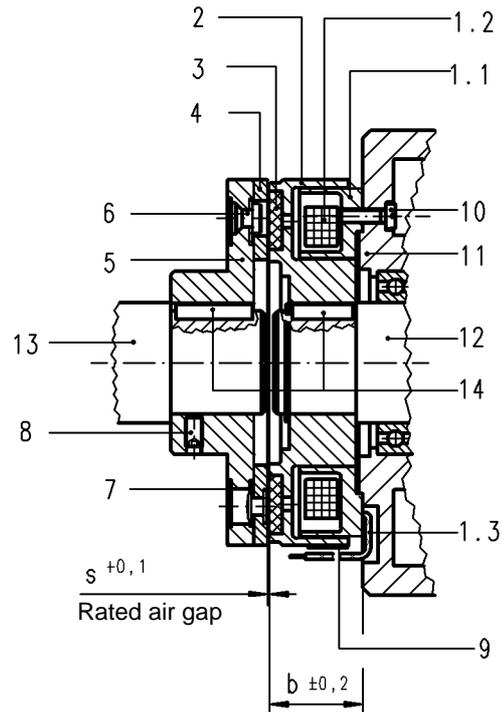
/1: Electromagnetic single-face clutch 86 011..E00 with flange hub (5)
